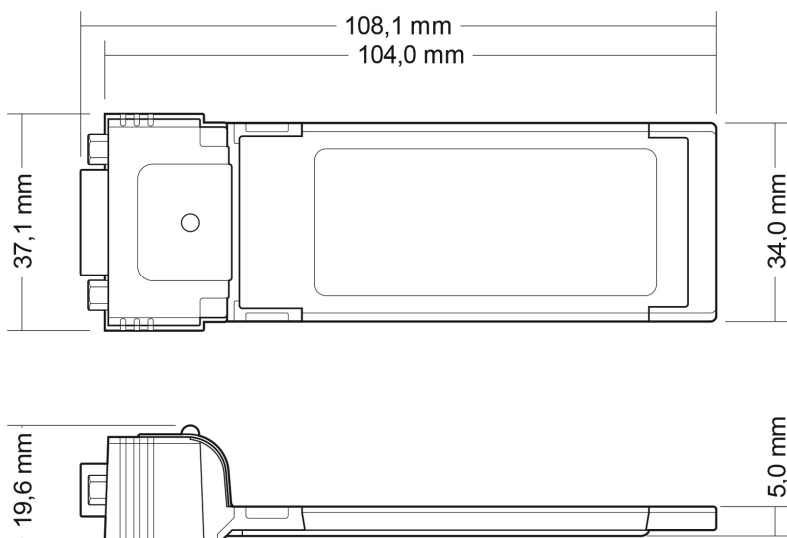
Side view and top view of the PCAN-ExpressCard 34
